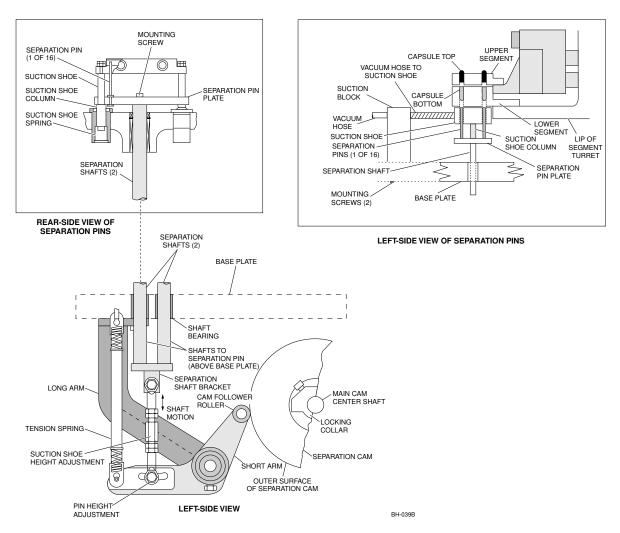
Rear-Side and Left-Side Views of Separation Shafts, Cam, and External Cam-Following Roller and Arm
